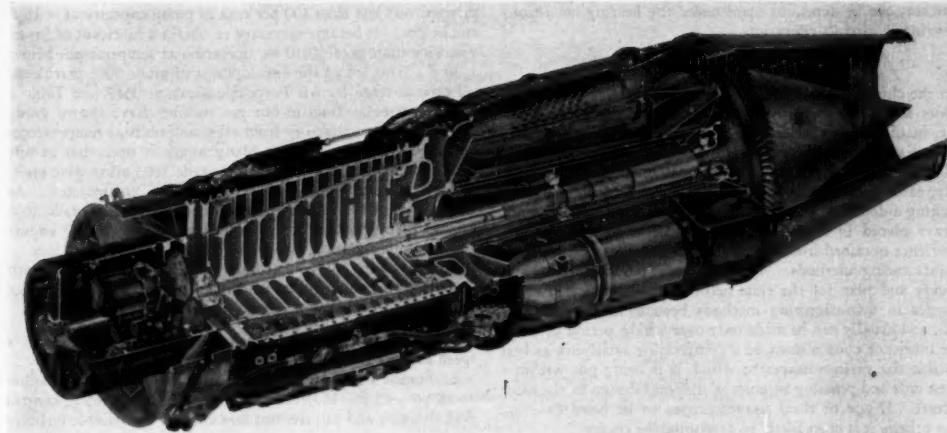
AIRCRAFT GAS-TURBINE ASSEMBLY CROSS SECTION
